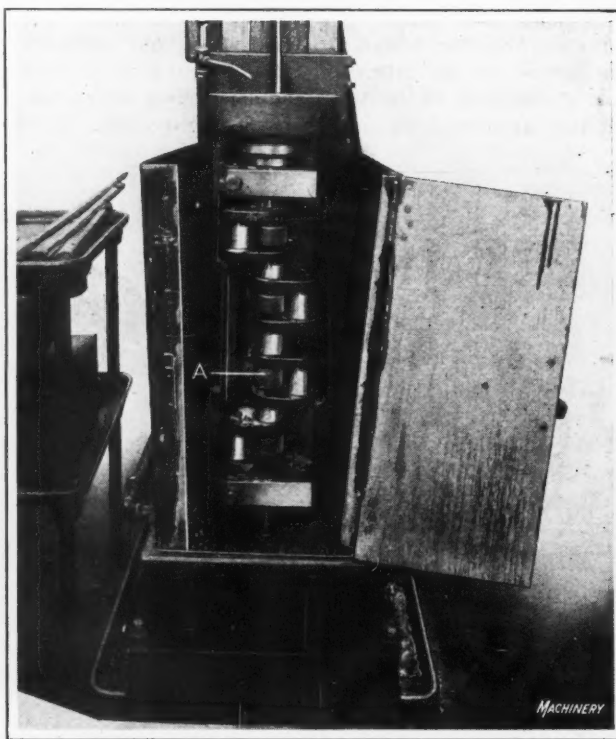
Set-up used on a Vertical Drilling Machine for drilling a One-inch Hole through each Bearing of the Crankshaft in One Operation
